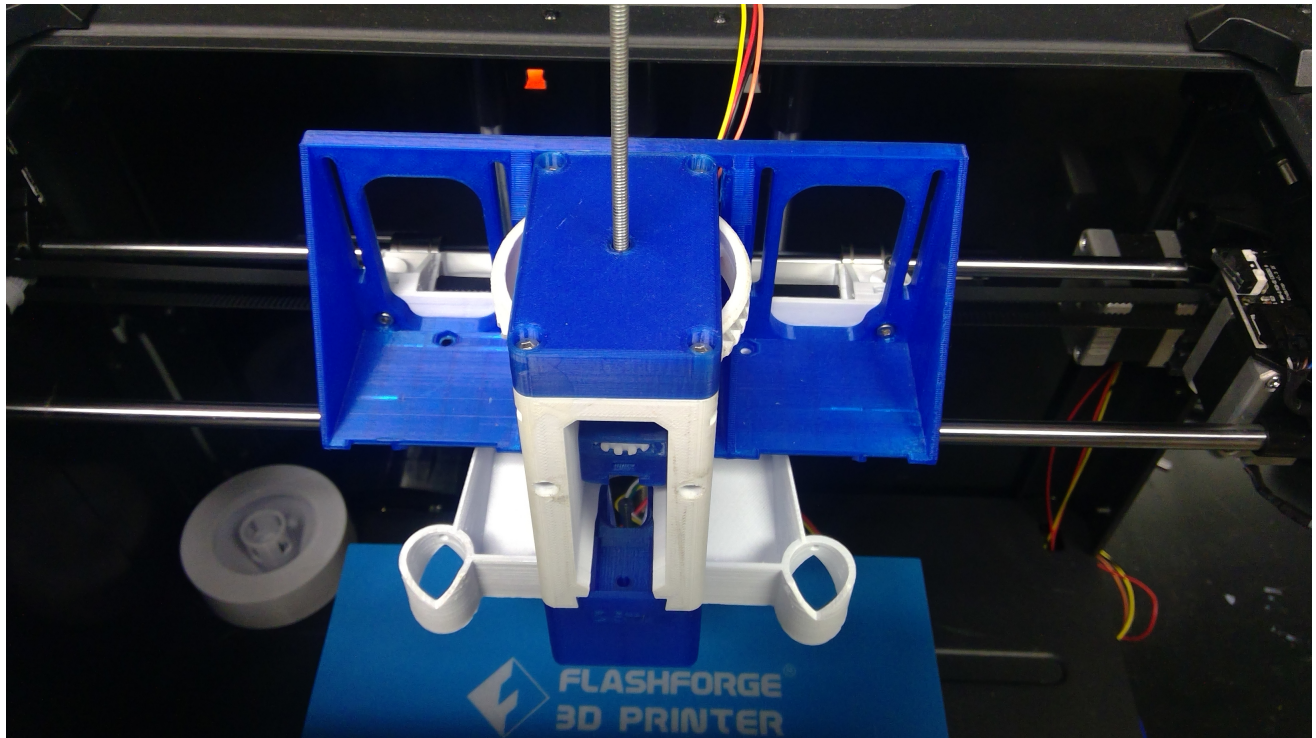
3D printed extruder mounted to the modified FlashForge Creator Pro bioprinter. Has spots for three extruders.
